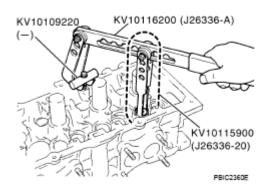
Compressing Valve Spring With Valve Spring Compressor Courtesy of NISSAN MOTOR CO., U.S.A.
